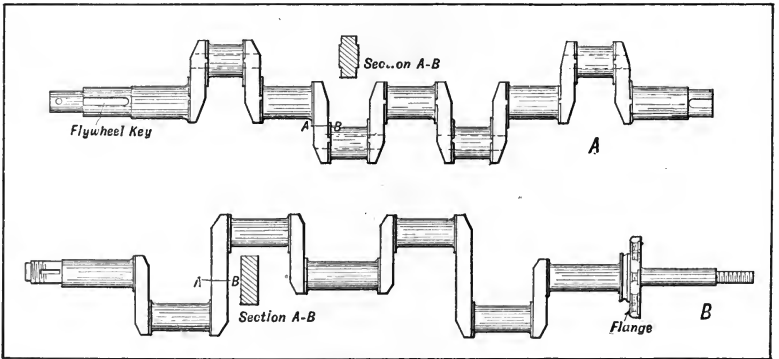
Two Forms of Four-Cylinder Crank Shaft. A—Five-Bearing Type with Fly-wheel Fastening Key at Front End. B—Three-Bearing Type with Flange for Securing Fly-wheel Formed Integral.
